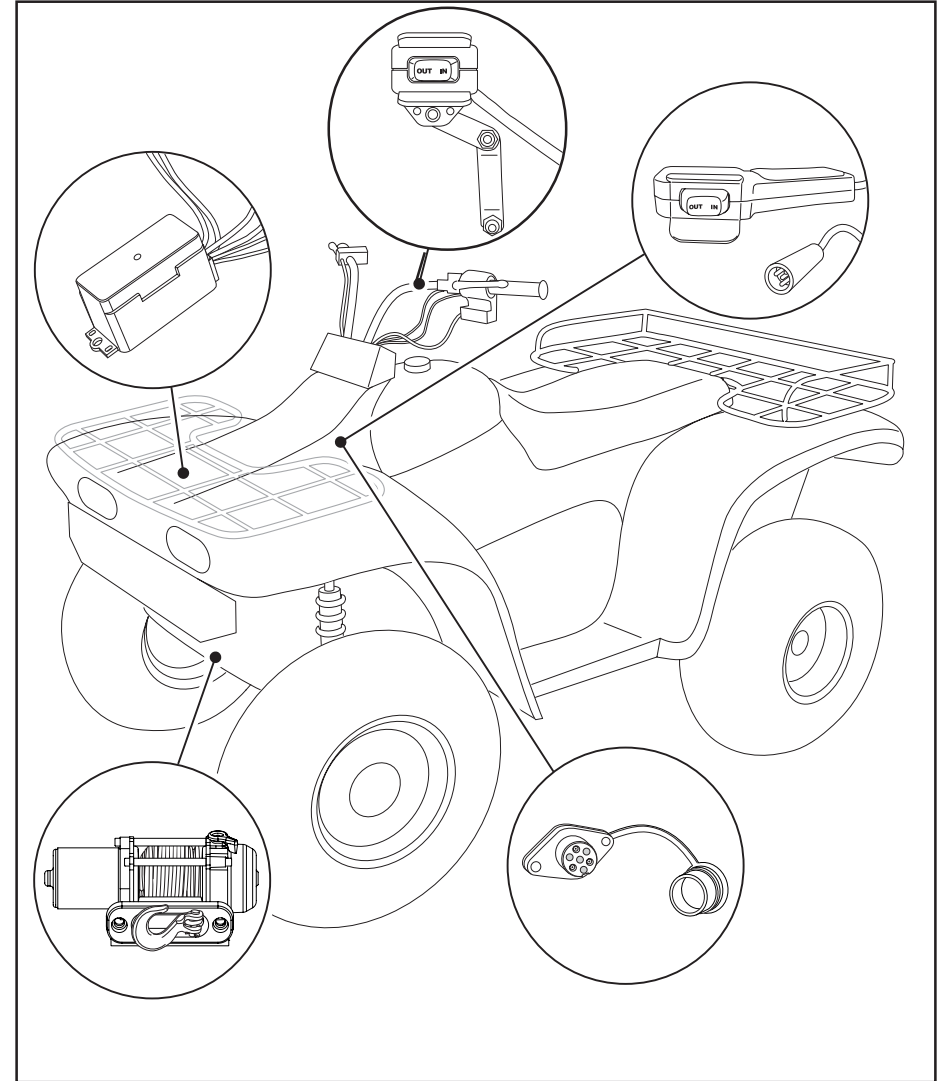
To install the complete kit, you will need to mount the winch, contactor handlebar mounted Mini-rocker switch and remote socket (optional on the 1.5ci winch). Mounting locations may vary depending on make and model of the ATV. Read and understand the following instructions to choose the appropriate mounting locations.
